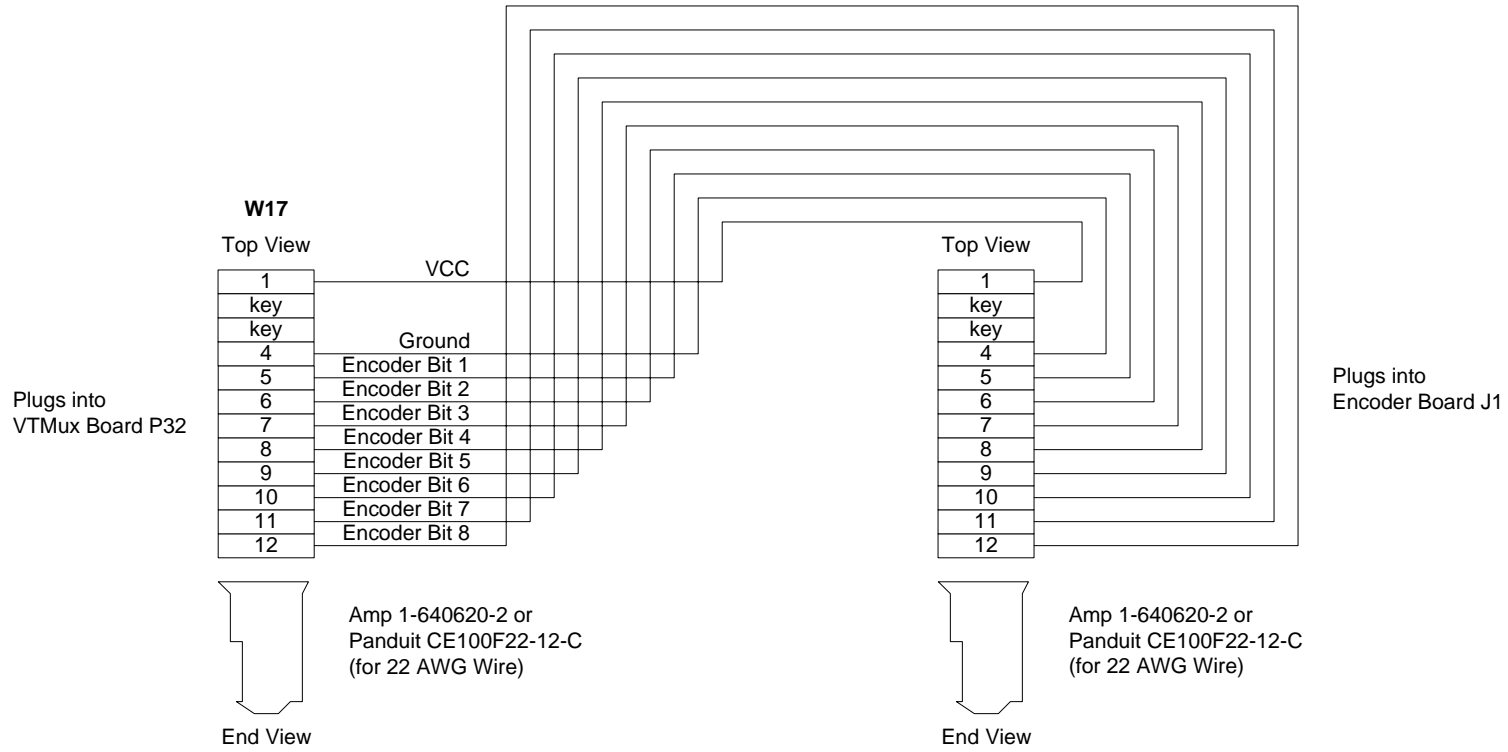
VTMUX BOARD P32 TO SPINNER SHAFT ENCODER
